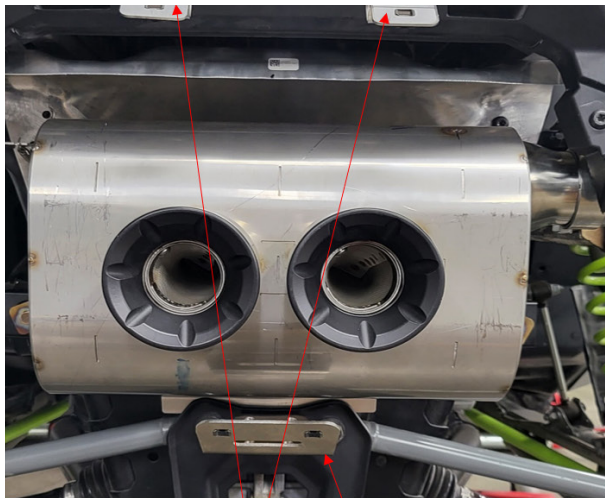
V&H EXHAUST SPRING MOUNT LOCATION
